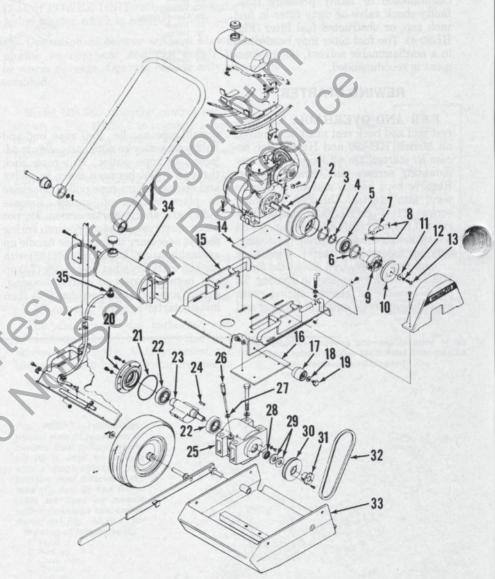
Exploded view of Model PCS-30 soil compactor. Model PCA-20 asphalt compactor is 19. Capscrew 20. Cover 21. "O" ring 22. Roller bearing
